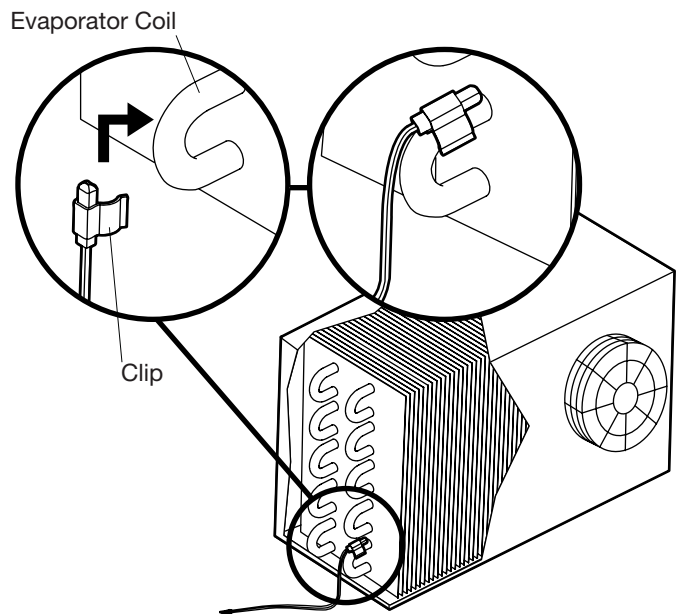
Connect Thermistor Probe to Evaporator Coil
